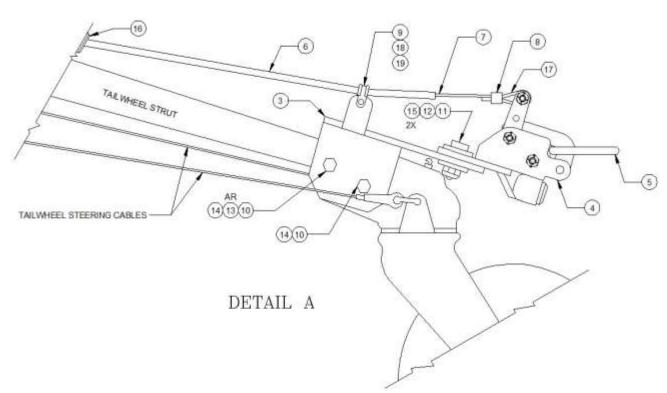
PATH Tow Hook Installation for Cessna Models 180 & 185, Detail A
